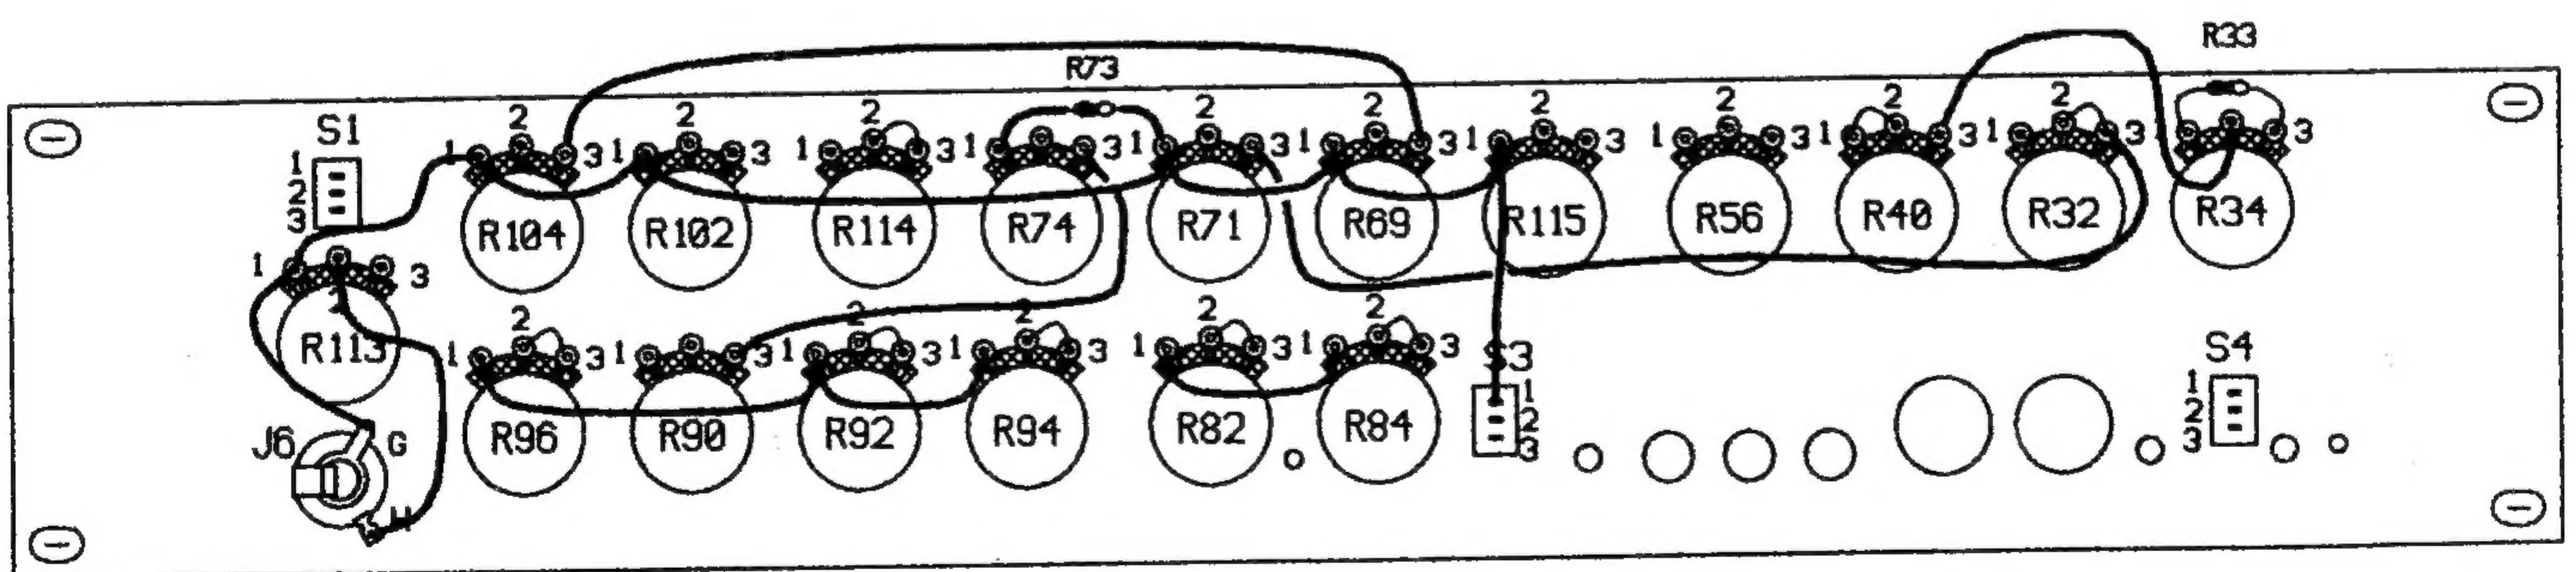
This point-to-point wiring of the front panel mounted parts will be easier if done before the circuit board is mounted. Note fixed resistors R33, R87 and R73 (with sleeving) which mount on pot lugs.
